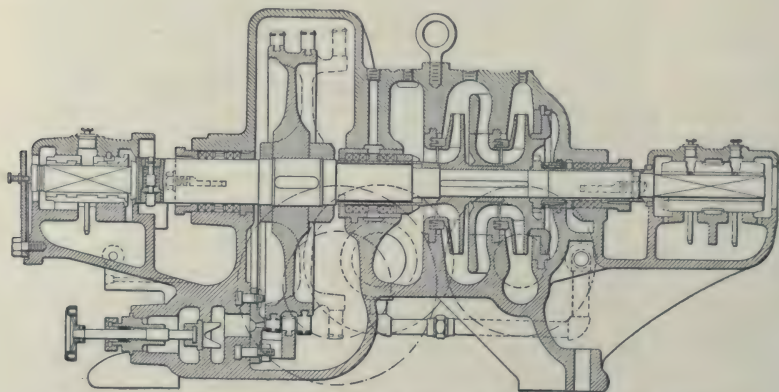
De Laval Turbine Driven Centrifugal Boiler Feeder.
